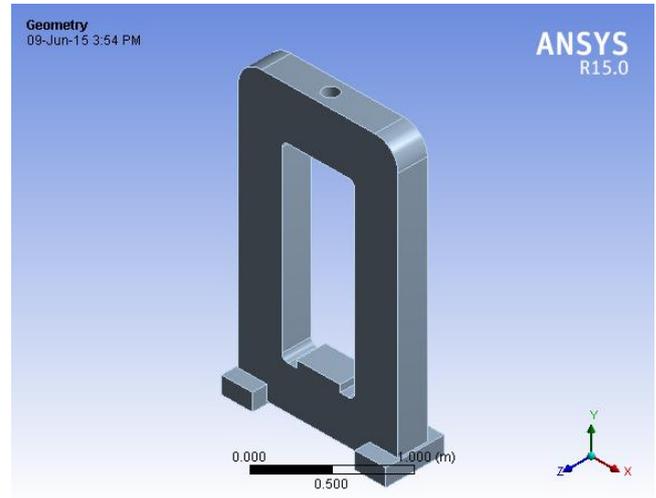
3D Model of Rolling Mill Housing (Static Structural)
